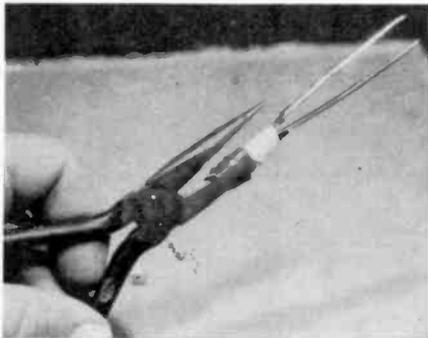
A simple extension tool can be devised to get those inaccessible screws, nuts, etc., by taping tweezers to long-nosed pliers or a spring-type clothespin.
